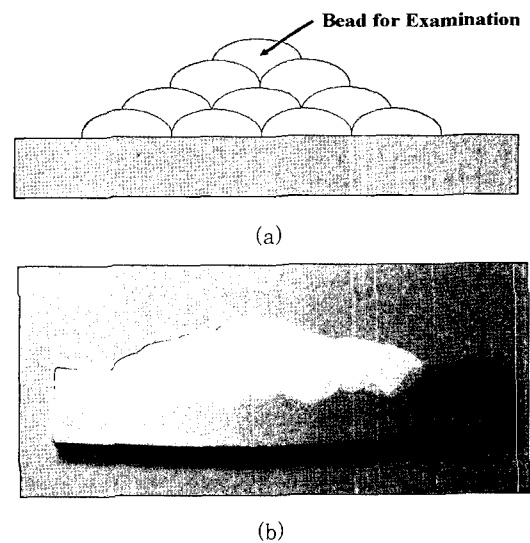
Specimen preparation: (a) build-up sequence, and (b) macrostructure of welded specimen prepared
